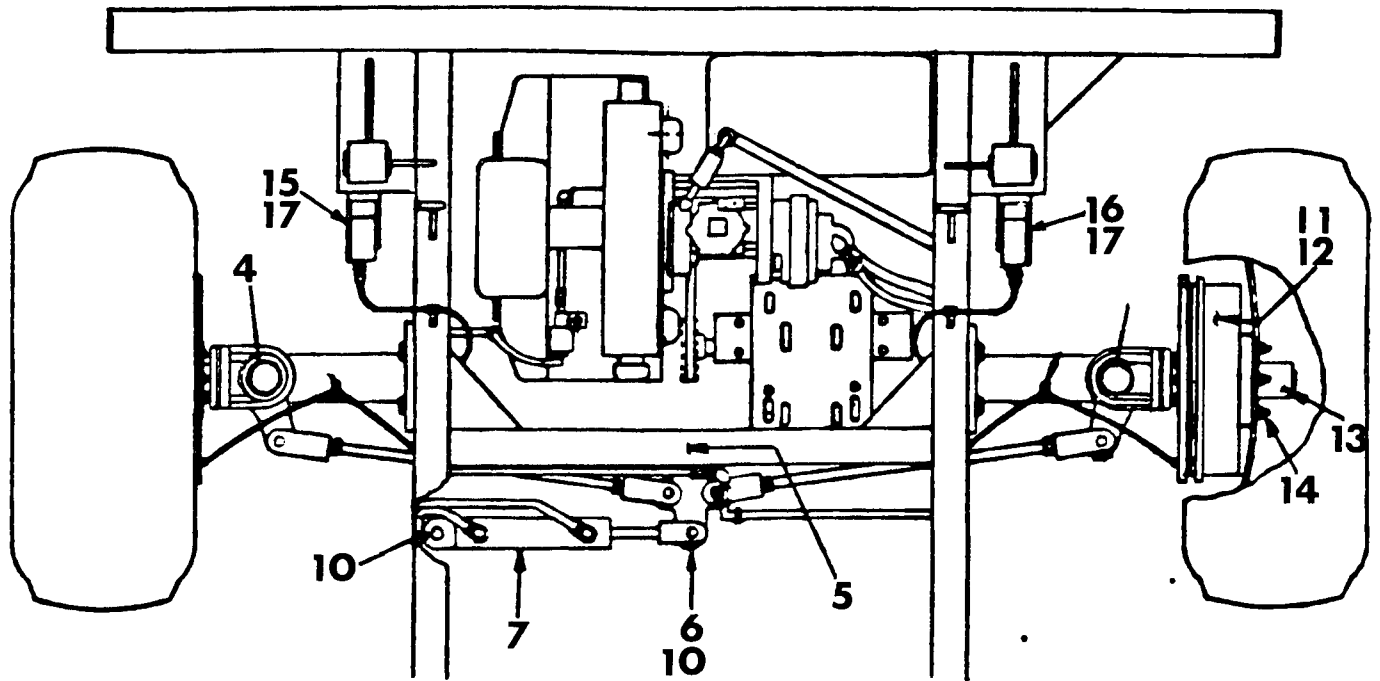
G - STEERING ASSEMBLY (RT26E) (RT26G)
